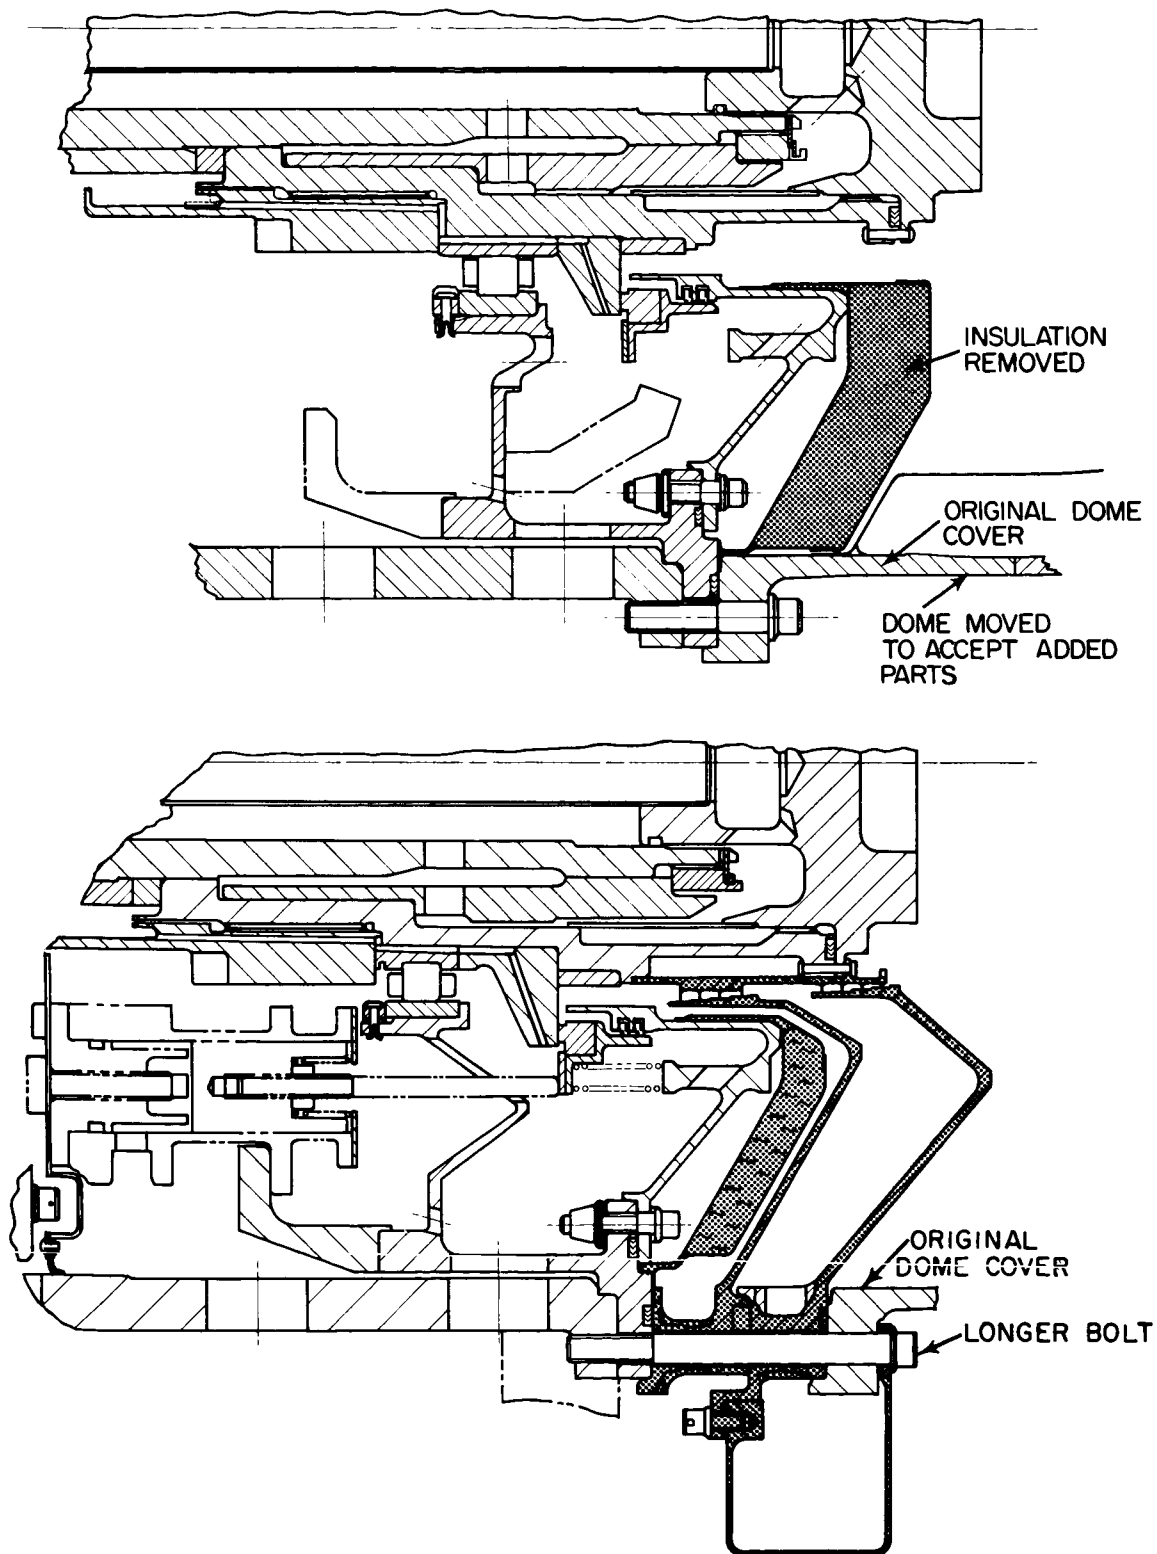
The Shaded Areas of These Two Layouts Illustrates the Changes Made to the Rig to Permit Testing of Seals Using an Inert Gas Blanket on the Oil Sump.
